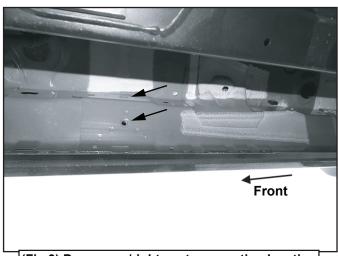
Attach the Passenger/Right TYGER Armor to the front mounting location
